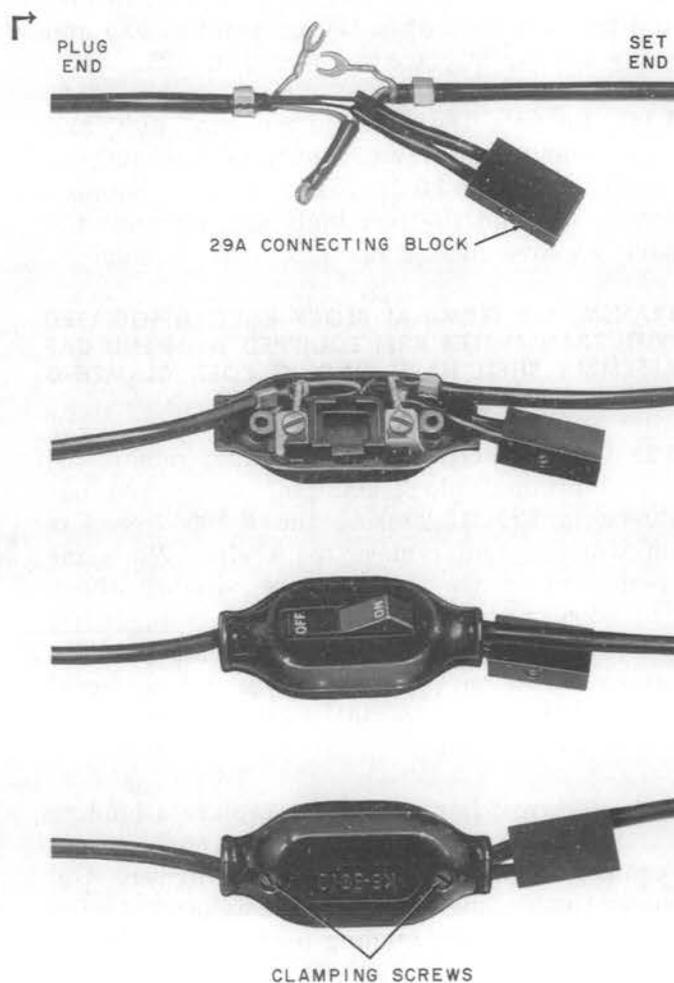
L4BY Cord Switch and 29A Connecting Block Assembly
